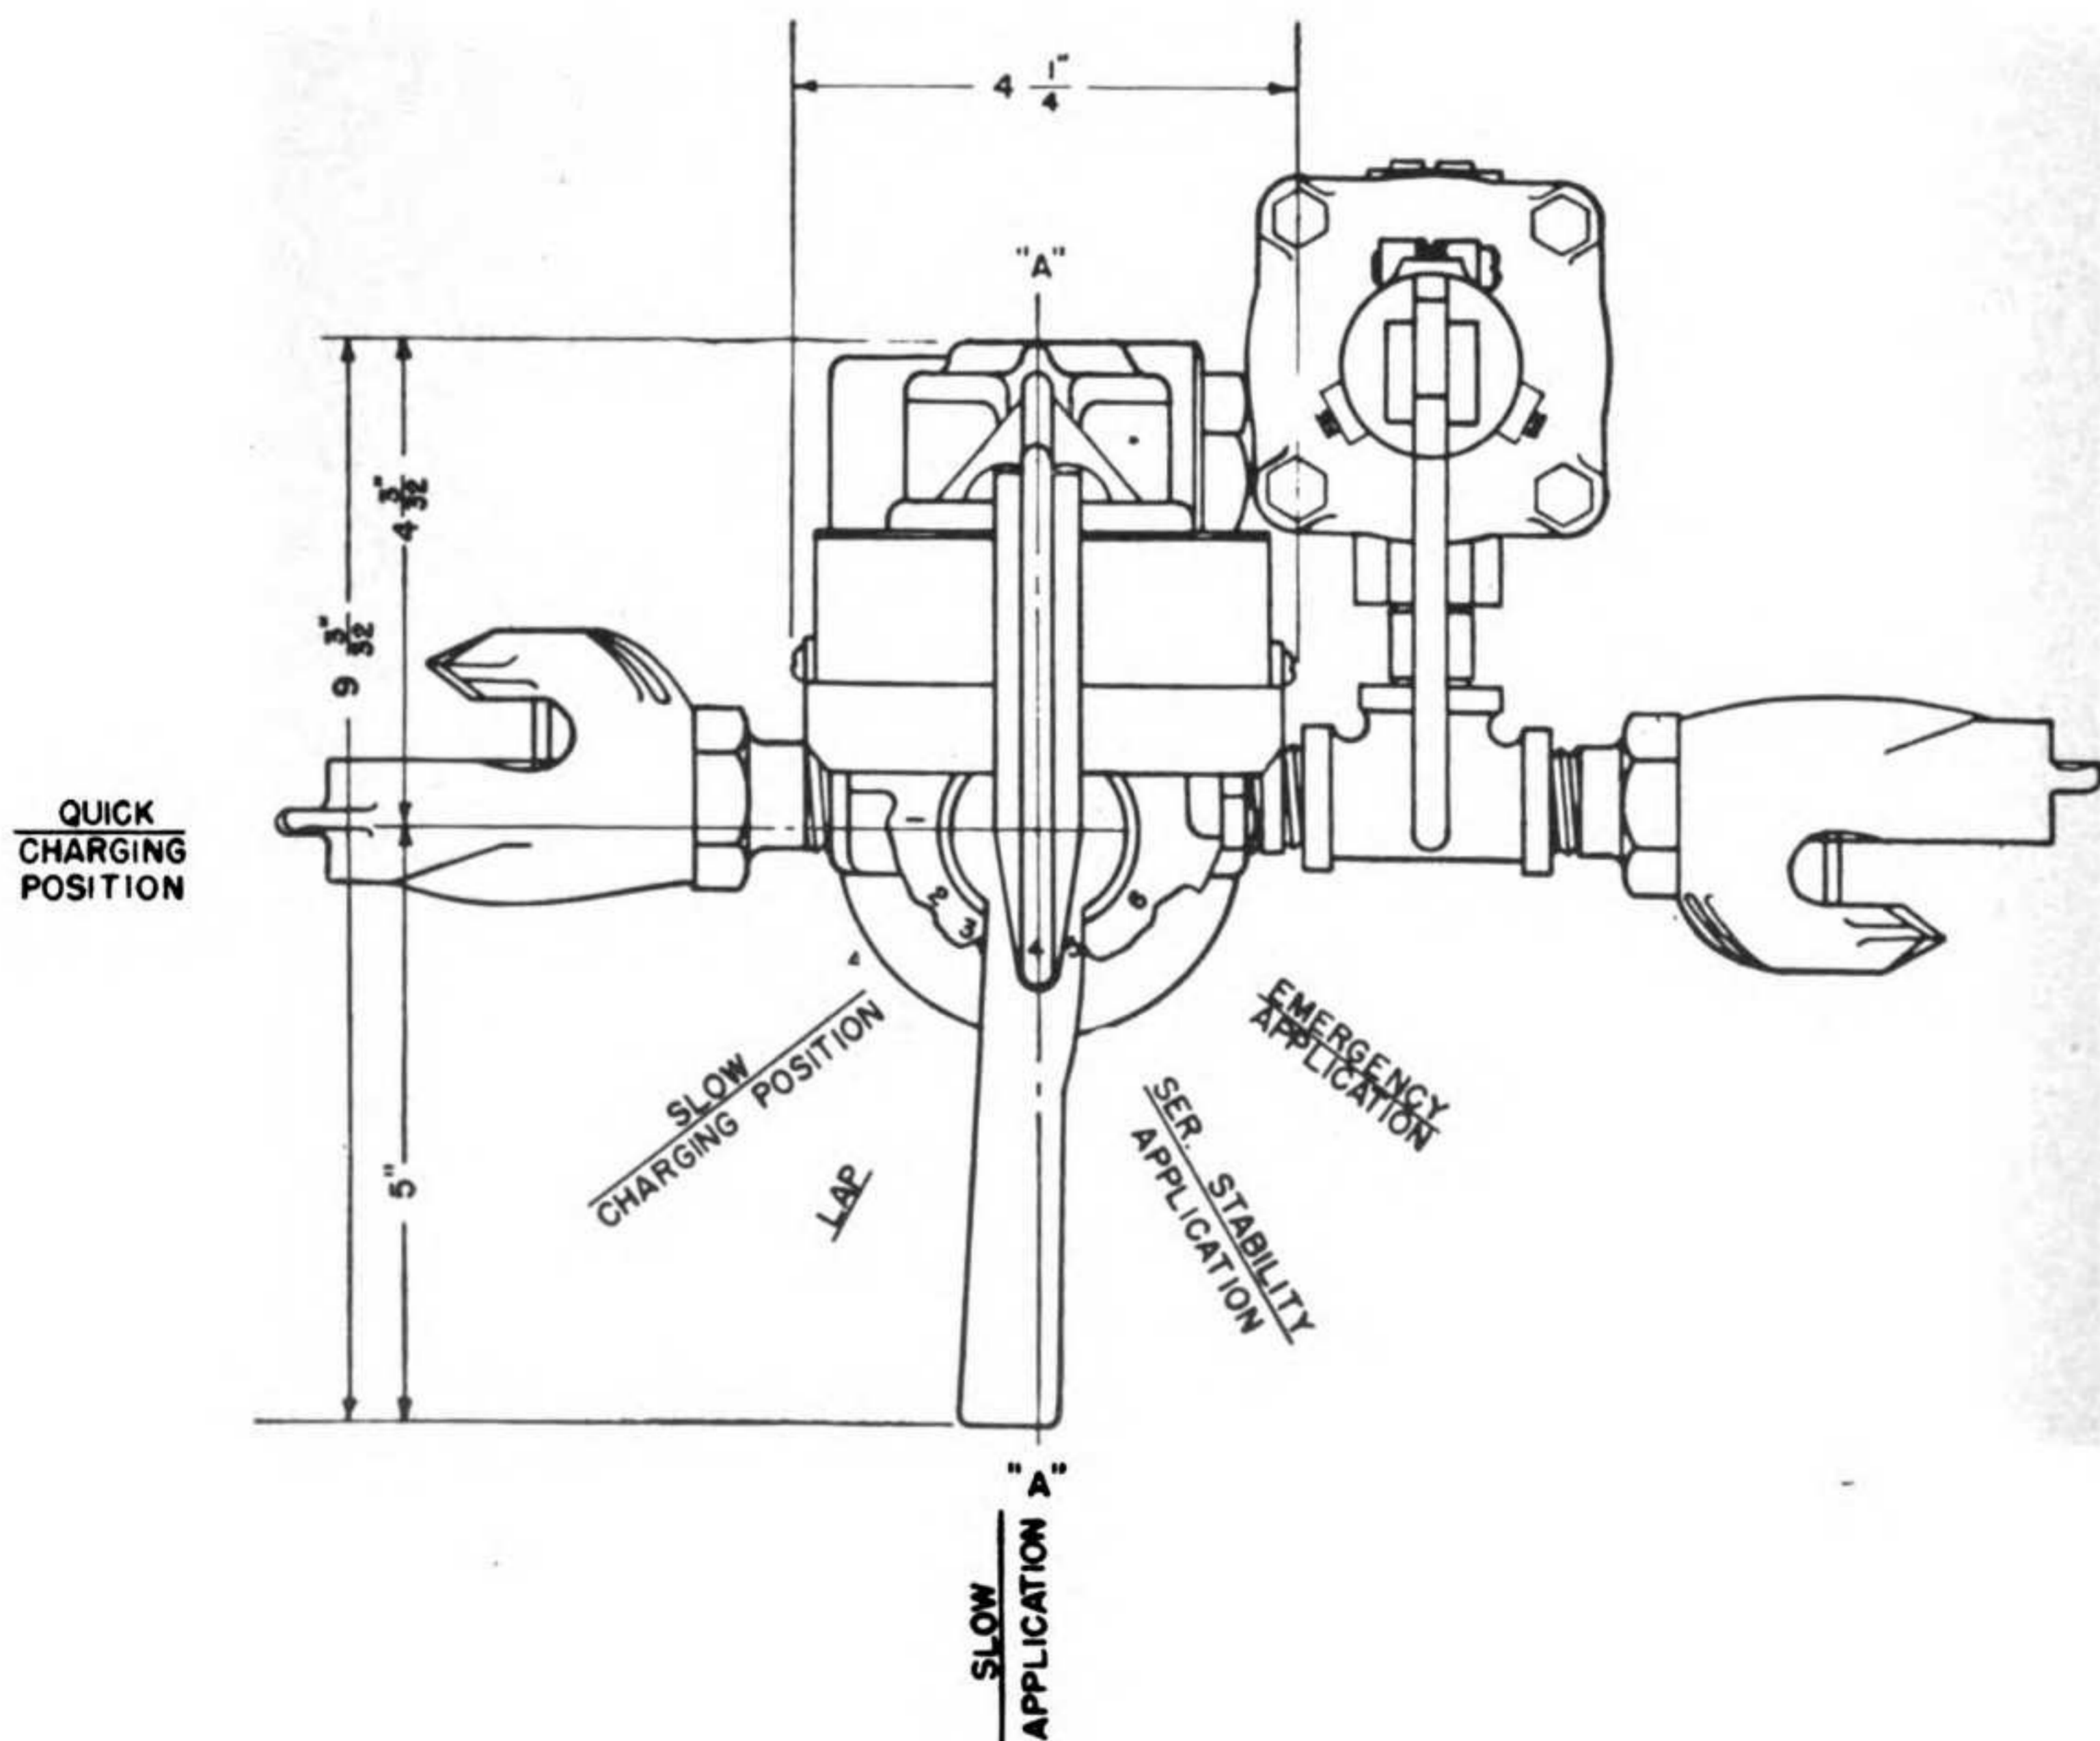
Single car testing device (top view). (TC stock No. 18-8084-80-100.)
